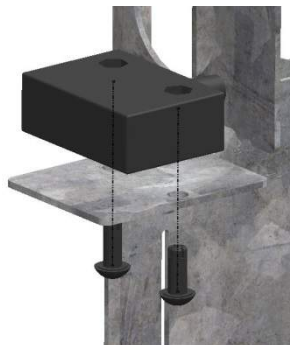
Limit-switch sensor assembled with 2 plastic rivets.
